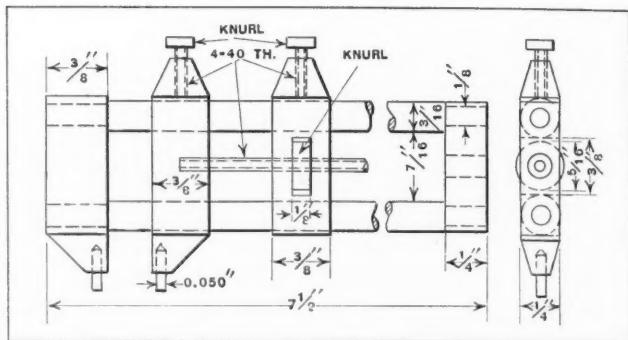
Hand Press for Assembling Clip Shown in Fig. 1 to Pencil Barrel
